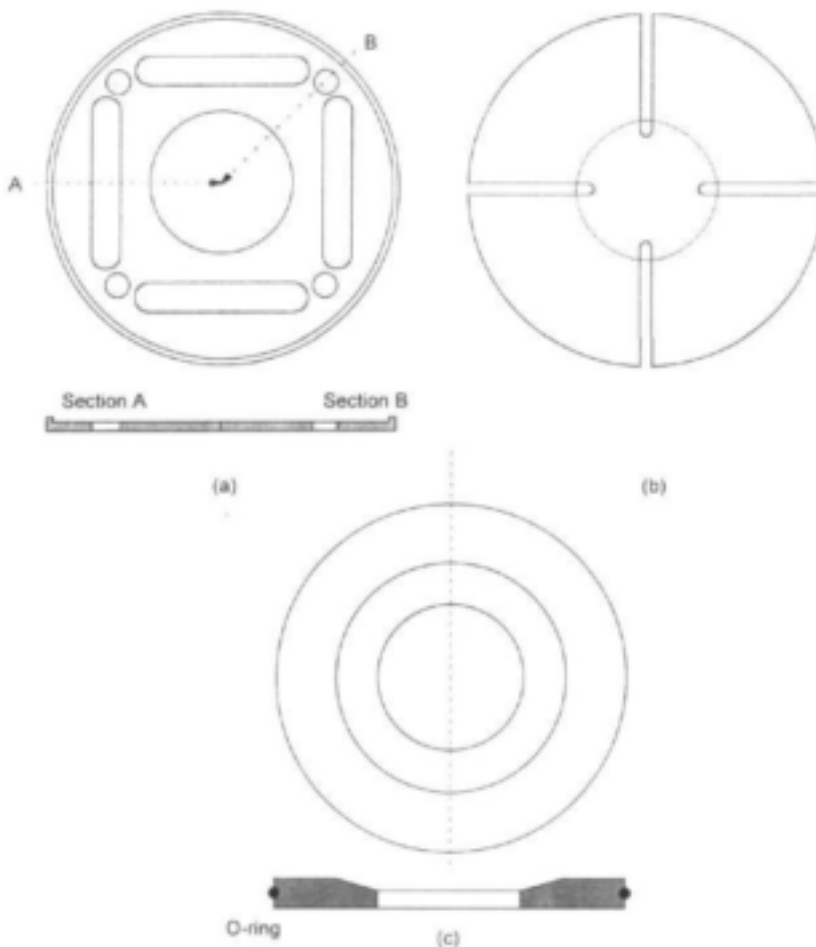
Centrifugal casting apparatus: (a) disc mould, (b) distributor plate, and (c) cover plate.
